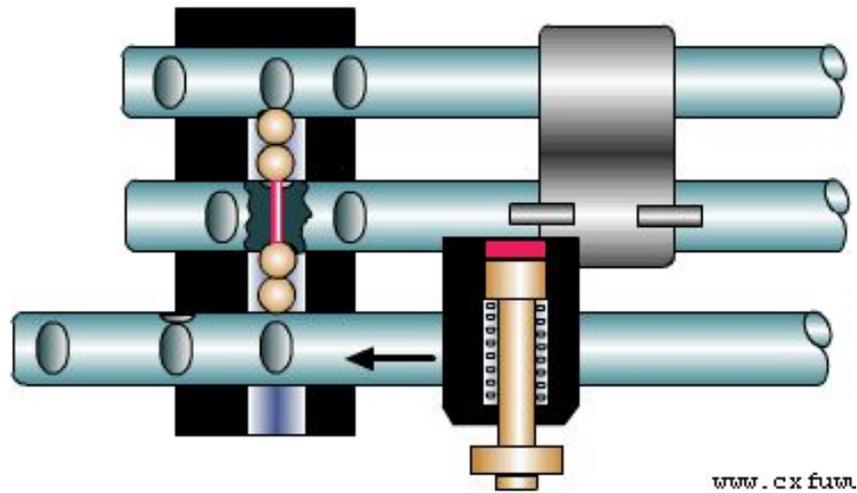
Reverse gear lock (www.cxfuwu.com).
